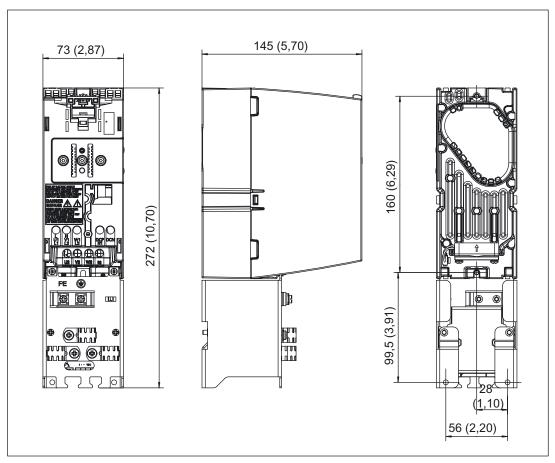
Dimension drawing: Power Module PM340 with Screening Kit and Brake Relay, frame size FSA
